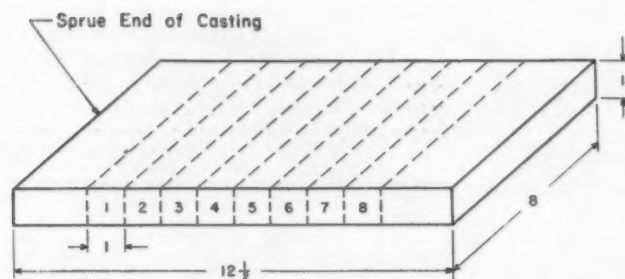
Plate as cut from final casting and method of cutting and numbering test bars from the casting.
